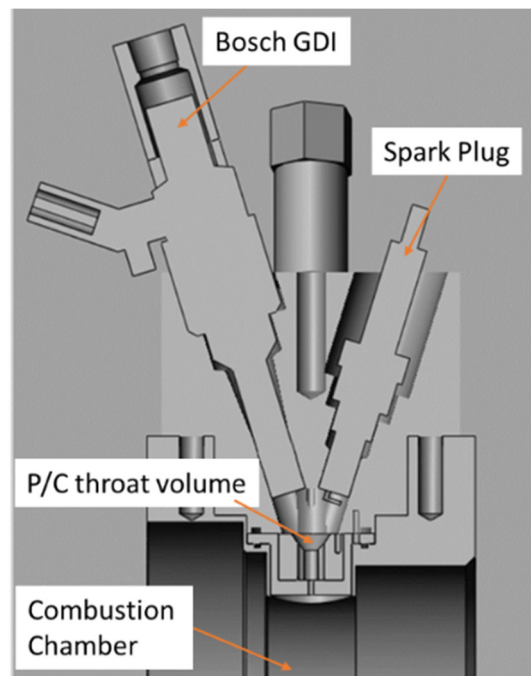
Cross sectional view of the TJI igniter installed in RCM head.
